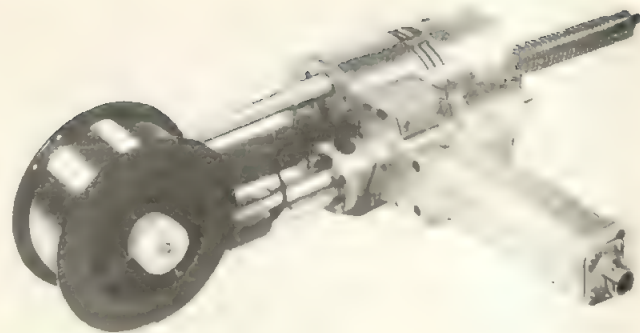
Tube-to-tube sheet welding head.
